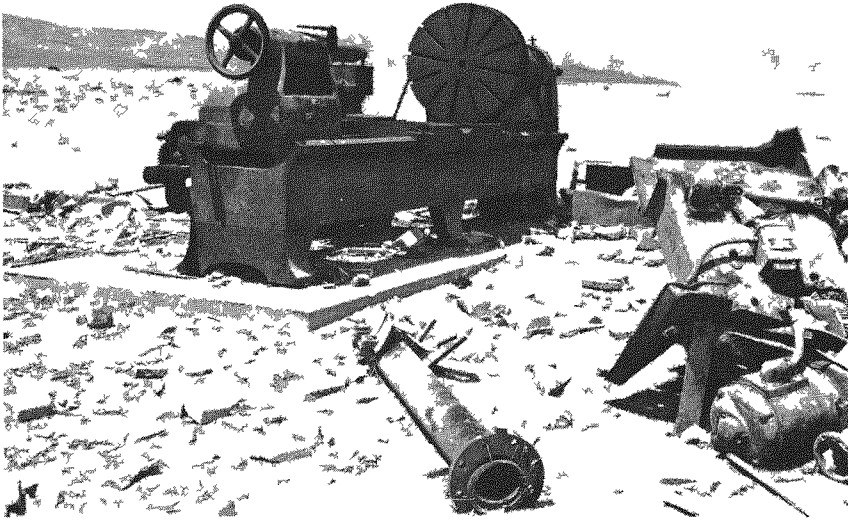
76b Heavy-duty lathe after the nuclear explosion (10 psi over pressure)
